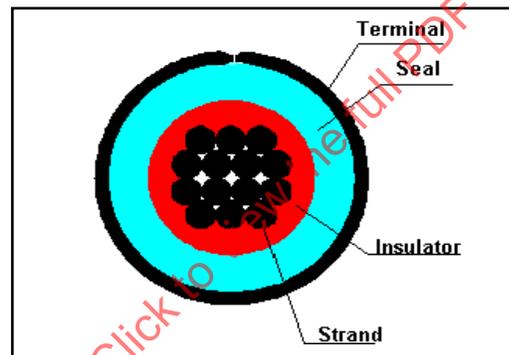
A - CABLE SEAL CROSS-SECTION (INCLUDING TERMINAL AND WIRE)
